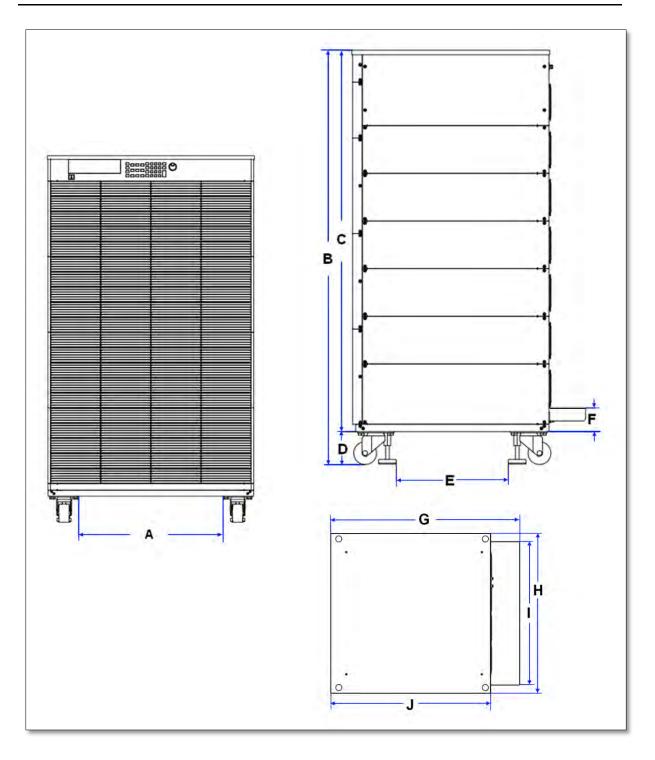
5VP Series Cabinet Dimensions- Large
